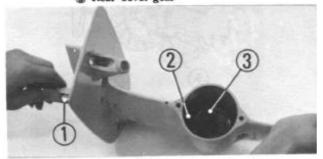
① Pinion shaft ② Front bevel gear ② Bevel pinion
